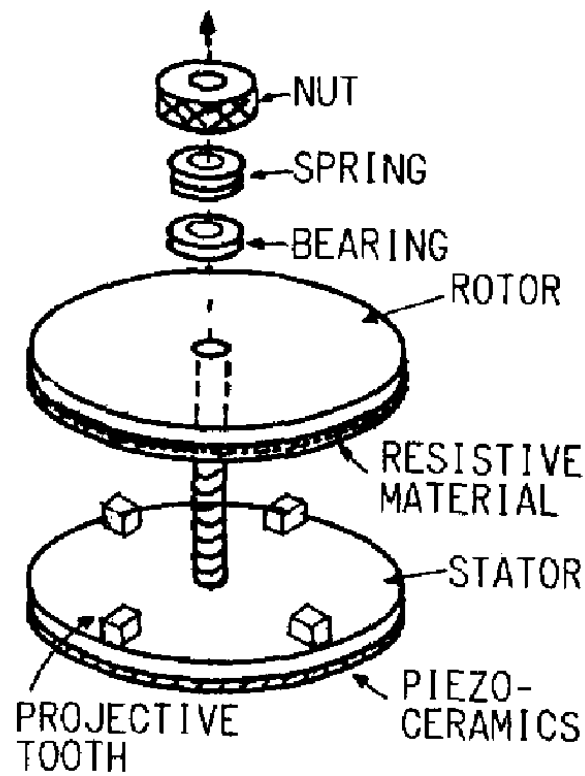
Disk type motor assembly by Takehiro [15].
